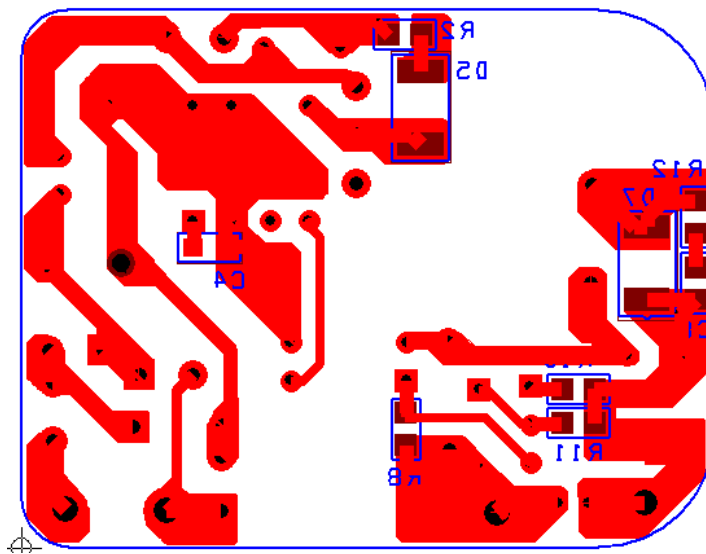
Printed Circuit Layout. Bottom Silk Screen and Copper Bottom Layers.
